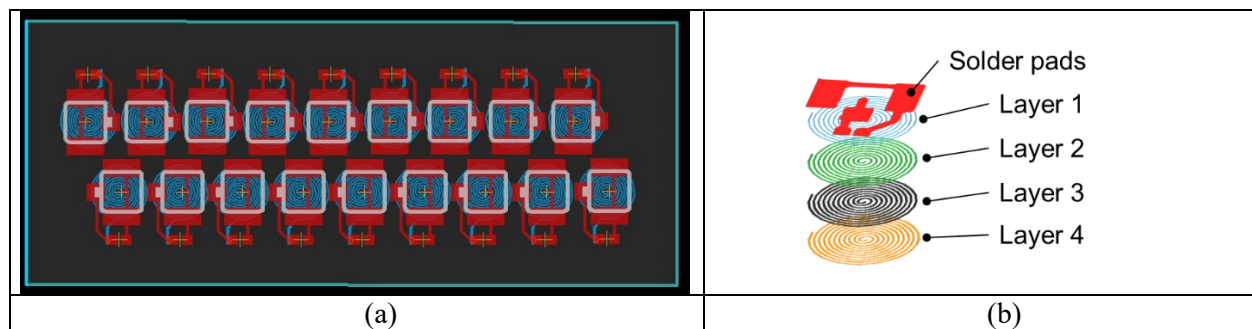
Drawings of array probes E-2b (4-layer) and E-2c (2-layer): (a) PCB top view; (b) multi-layer PCB structure.
